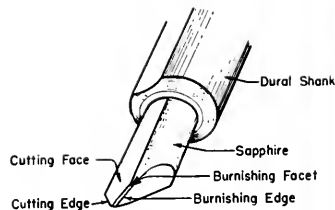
Enlarged drawing of lacquer cutting stylus, showing burnishing facets which give high polish to groove side walls.
